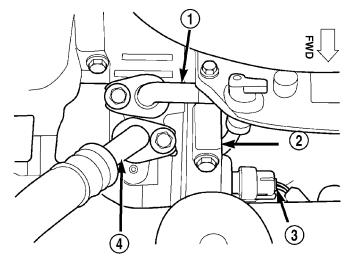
A/C COMPRESSOR REMOVAL/ INSTALLATION - 2.4L TURBO
